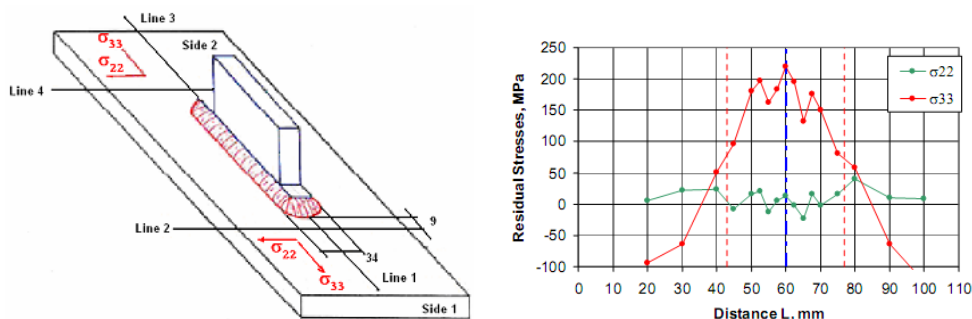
Typical specimen with welded attachment and residual welding stress distribution (Section indicated «Line 2»), MPa [12]
